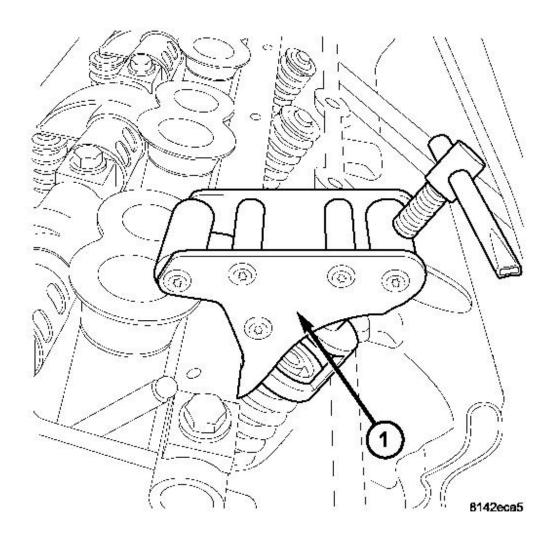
Valve Spring Remove/Install - Exhaust Courtesy of CHRYSLER LLC
